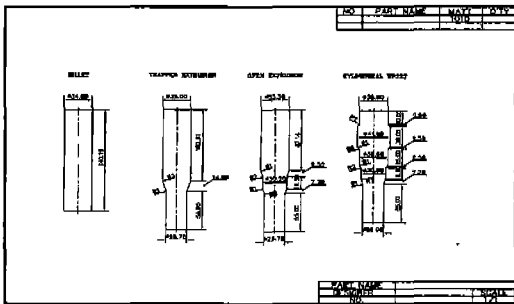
Sequence drawing considering dimensional tolerance of parts : billet diameter 35.6 mm(AISI 1010).
